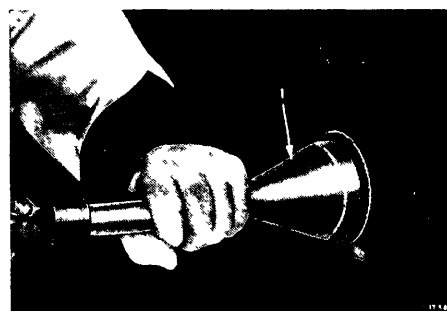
Installing drive pinion bearing oil seal with special driver (1), 1935-52
